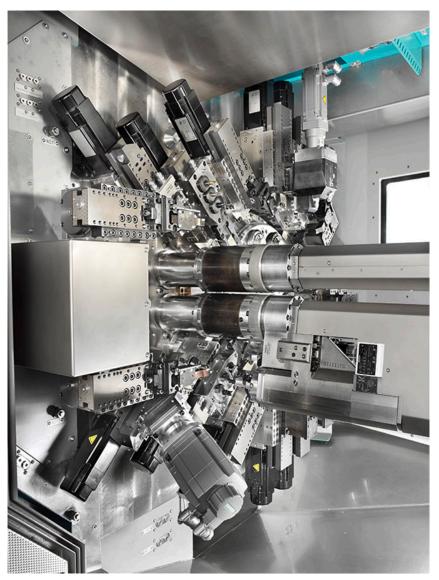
(view inside the machine area of the MS40-8): Flexibility with system: different tools for different machining operations per spindle position can be installed on the working slides.
